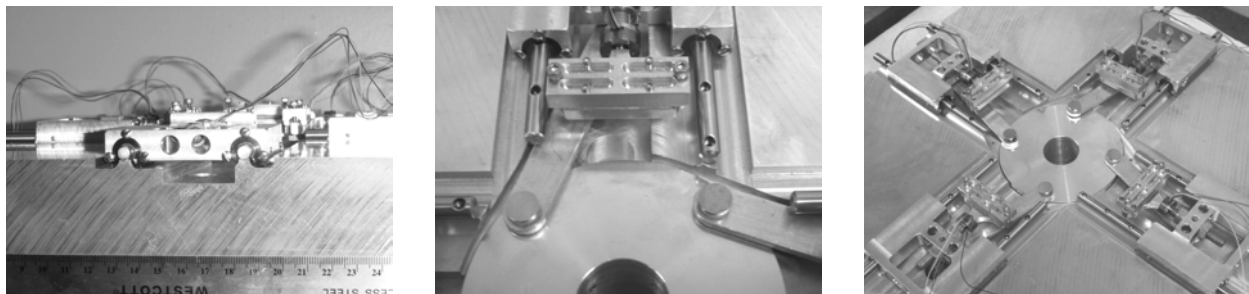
Upper assembly. From left to right: carriage (end view), carriage (frontal view), entire assembly (top view).
